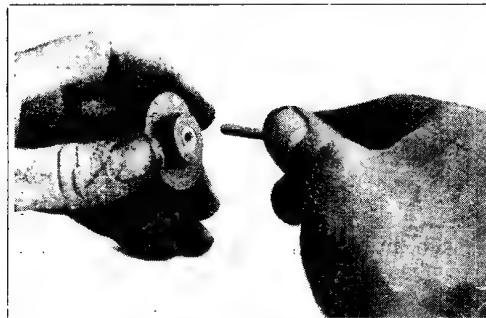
Embedded in the commonest form of ebonite knob is a brass centre-piece, into which the spindle is screwed
